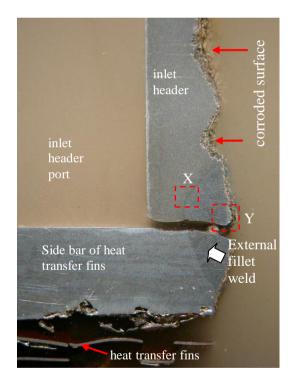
Cross section of a polished and etched specimen obtained from the leaked weld joint between header and side bar/parting sheet
